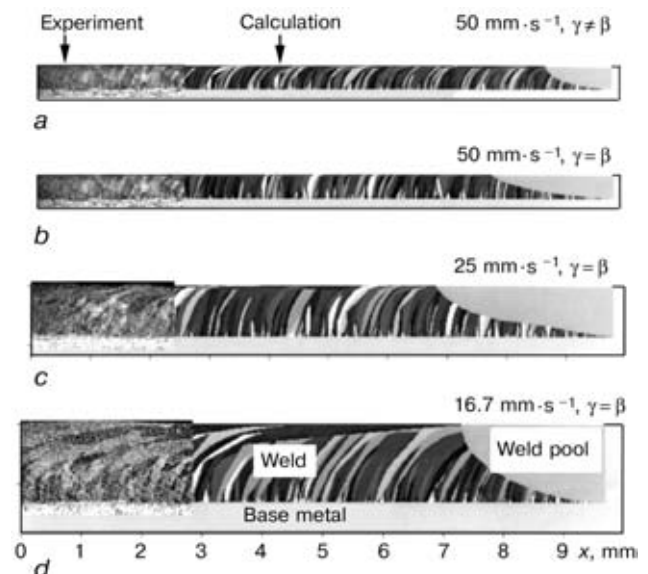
Experimental and calculated longitudinal macrosections at different welding speed (just the tail part of weld pool shown)
